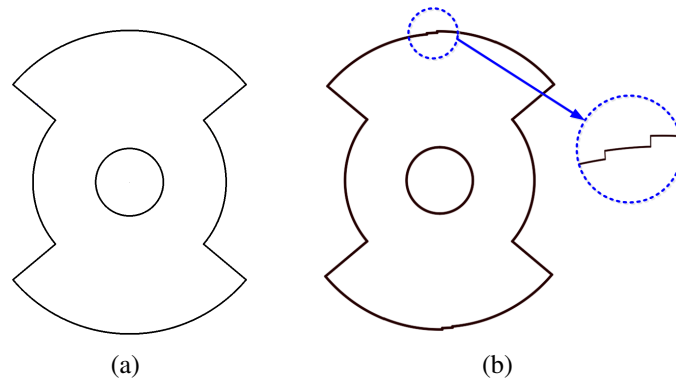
Rotor structure. (a) Conventional rotor structure. (b) Stepped rotor structure.
